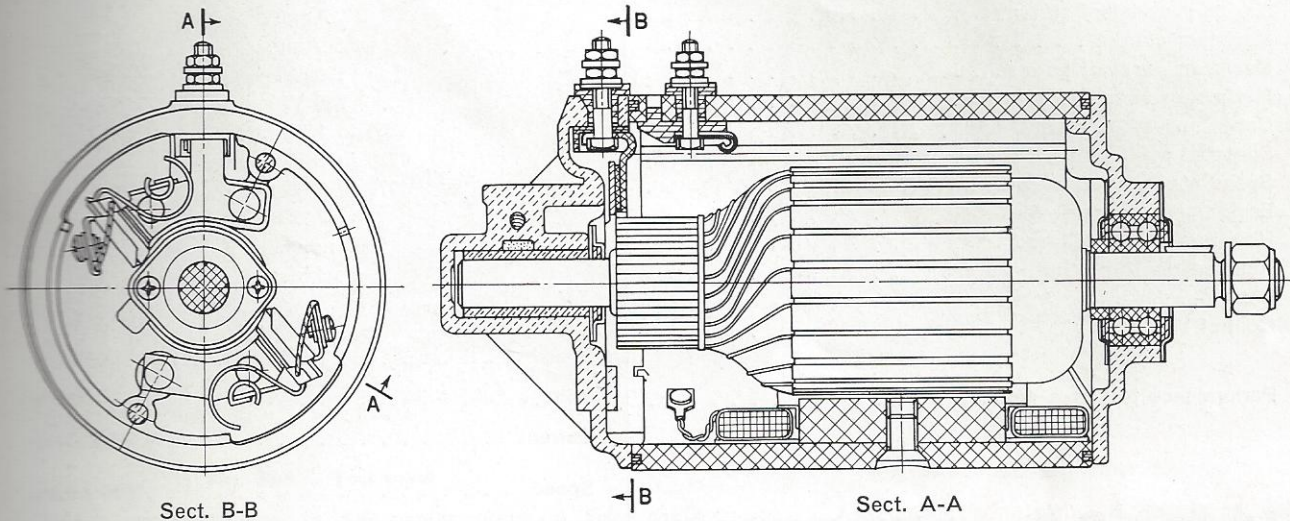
Sectional views of generator model DC 115/24/7/3.
